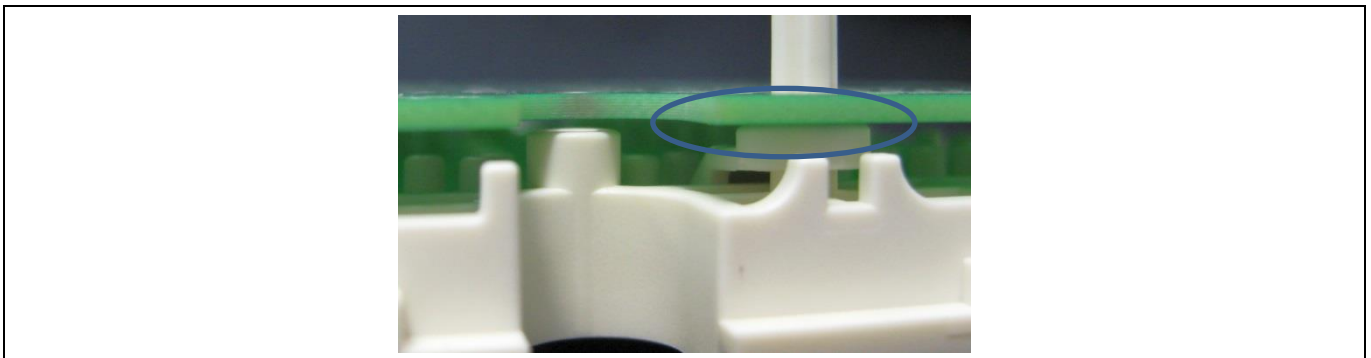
The module lid has contact to the PCB before it is pressed onto the power module. This ensures a contact after the PCB is assembled and avoids noise during vibration profiles.
